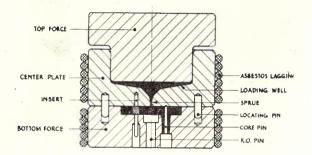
Example of the Use of a Transfer Type of Mould for Thermo-setting Resin.
